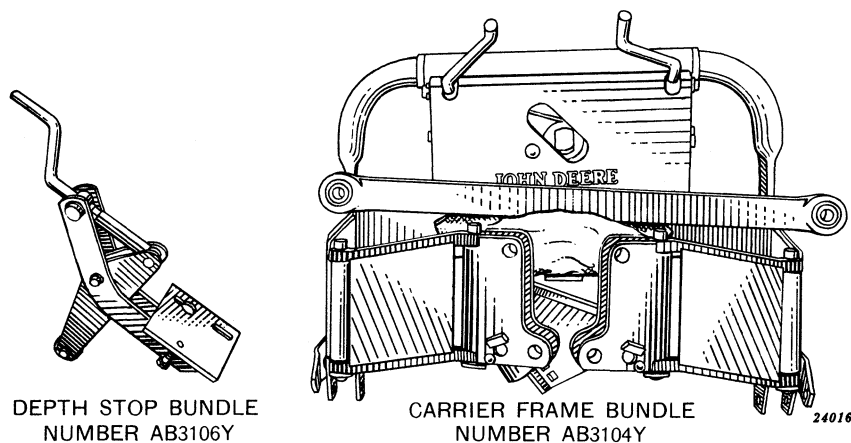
ABG-2000 Integral Tool Carrier Shipping Bundles
